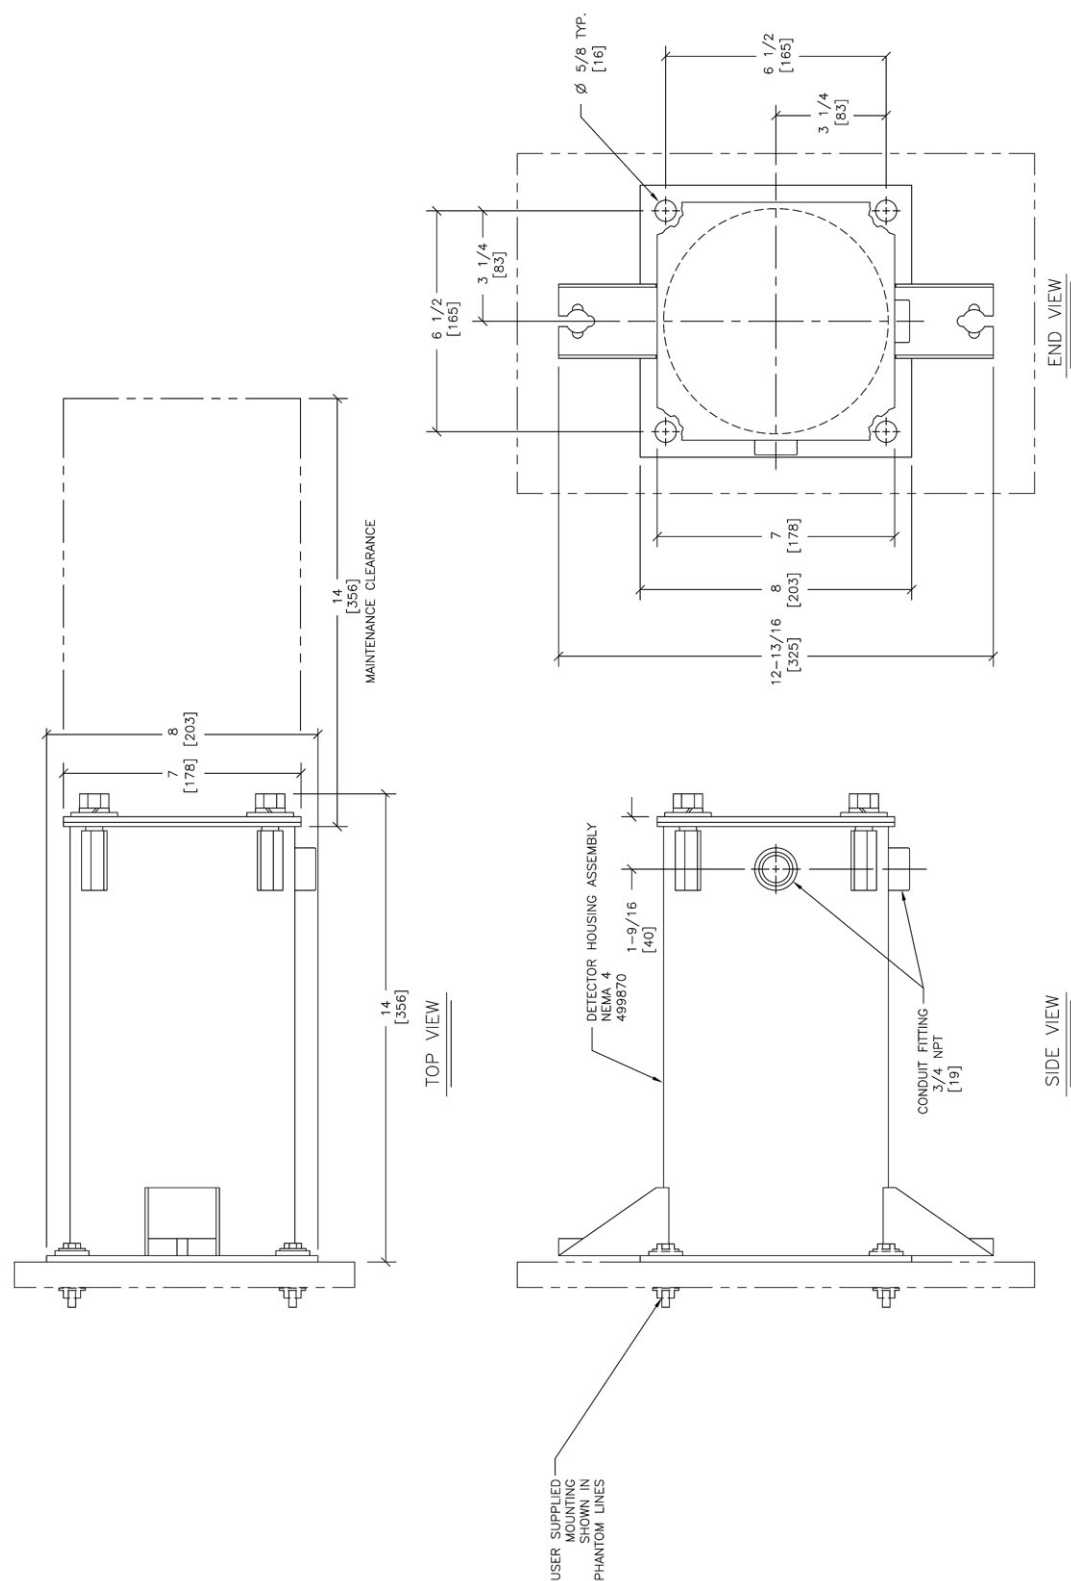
867468: Installation drawing, detector assembly, flat mount, NEMA 4 housing (sheet 1 of 1)
